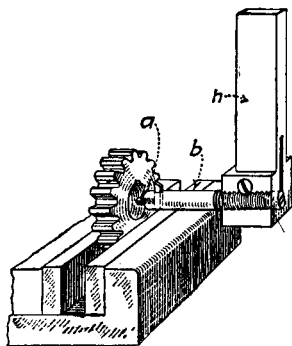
Planing a keyway in a gear (see also Fig. 2-59).
